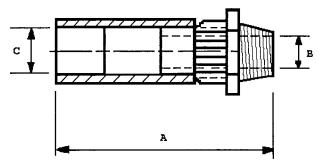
Type II-Single-Legged Threaded Cable Entry Seals
